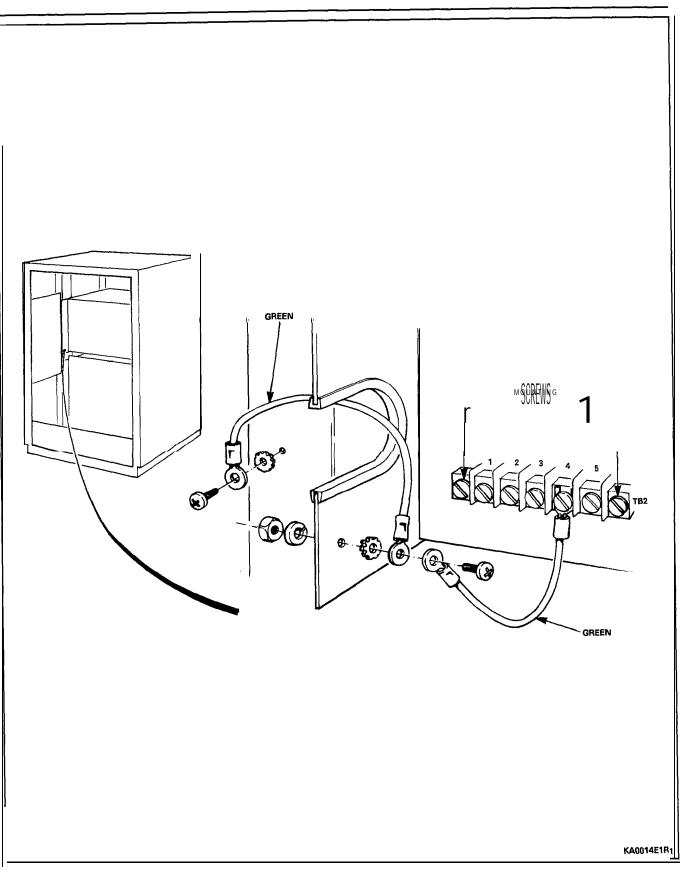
Cardfile to Frame and Backplane Ground Connections
